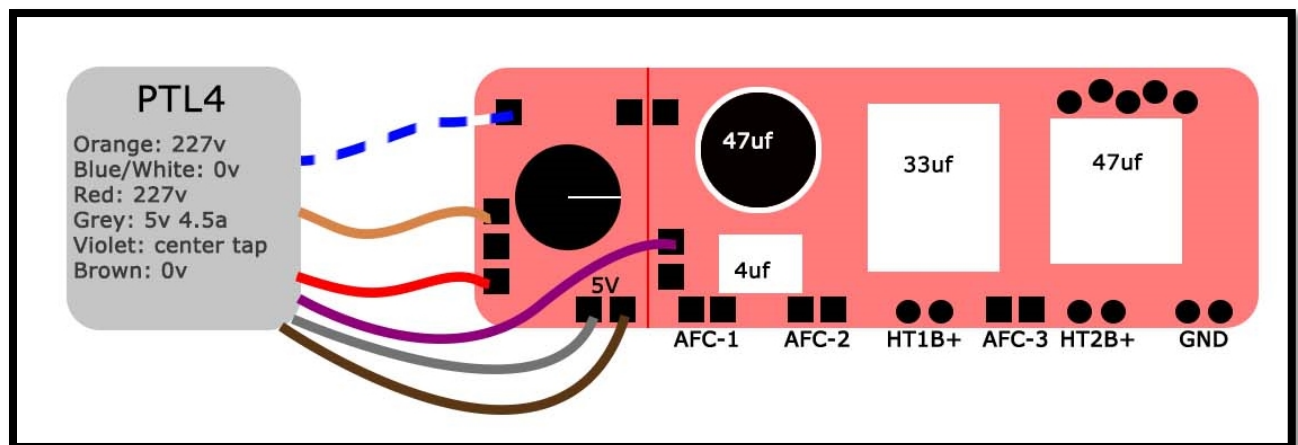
Wiring the PTL4 Transformer to the Power Supply PCB
